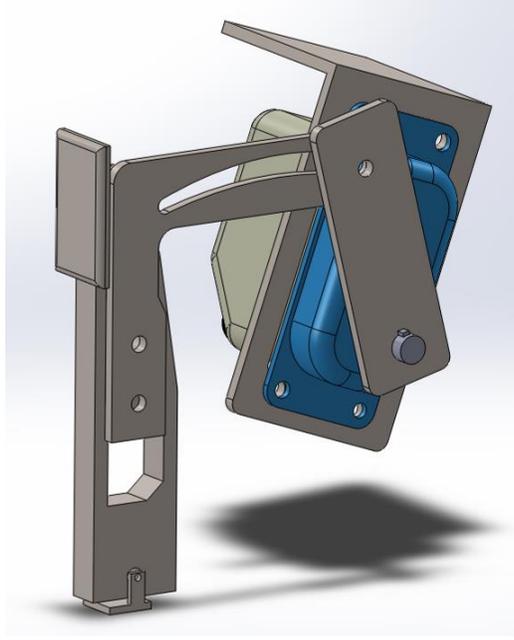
CAD Drawing of an initial brake-by-wire design concept.
